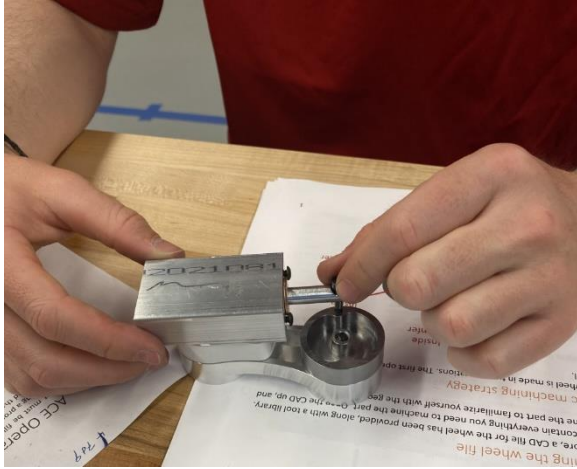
Oscillating piston air engine produced during in-person CNC machining training.
